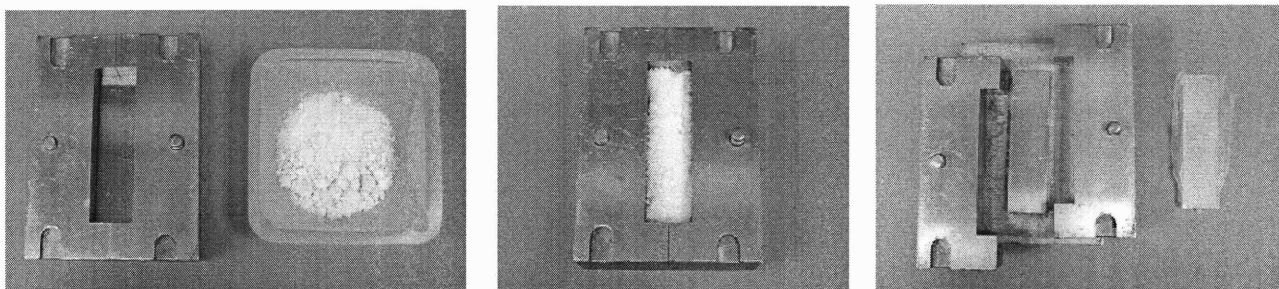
Pictures of filling mold, closing mold and mold open with processed object.
